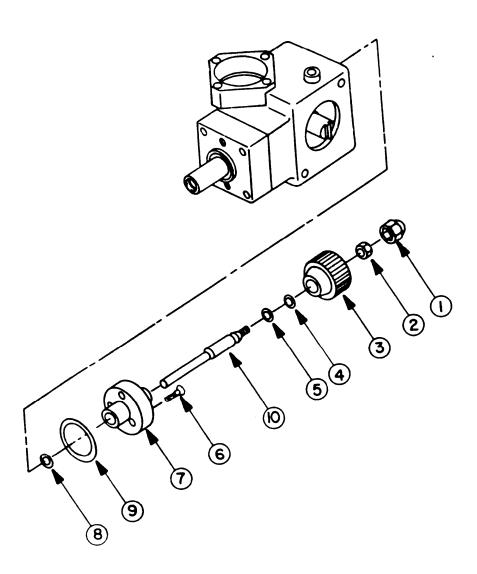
Chemical Feed Pump Stroke Adjustment Control (ARMY)
